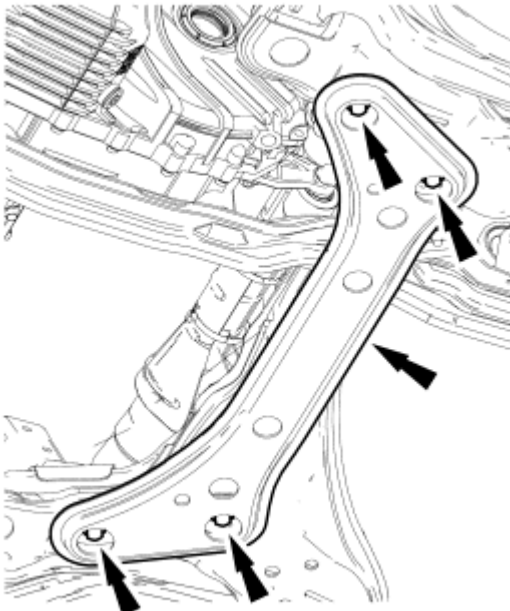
Identifying Lateral Support Crossmember And Bolts
